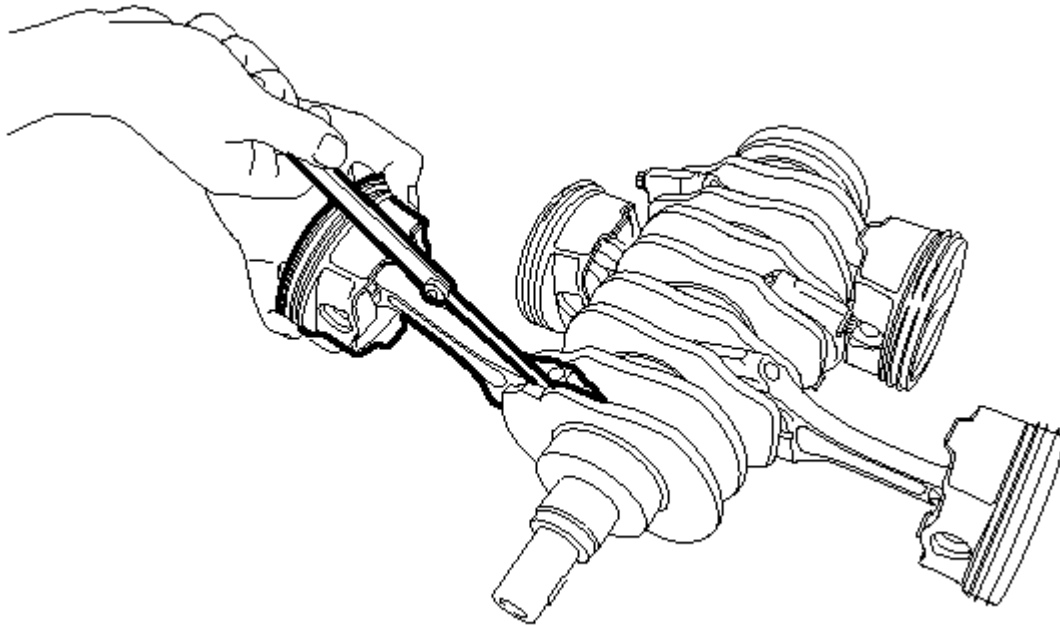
Tighten The Connecting Rod Cup Bolts
